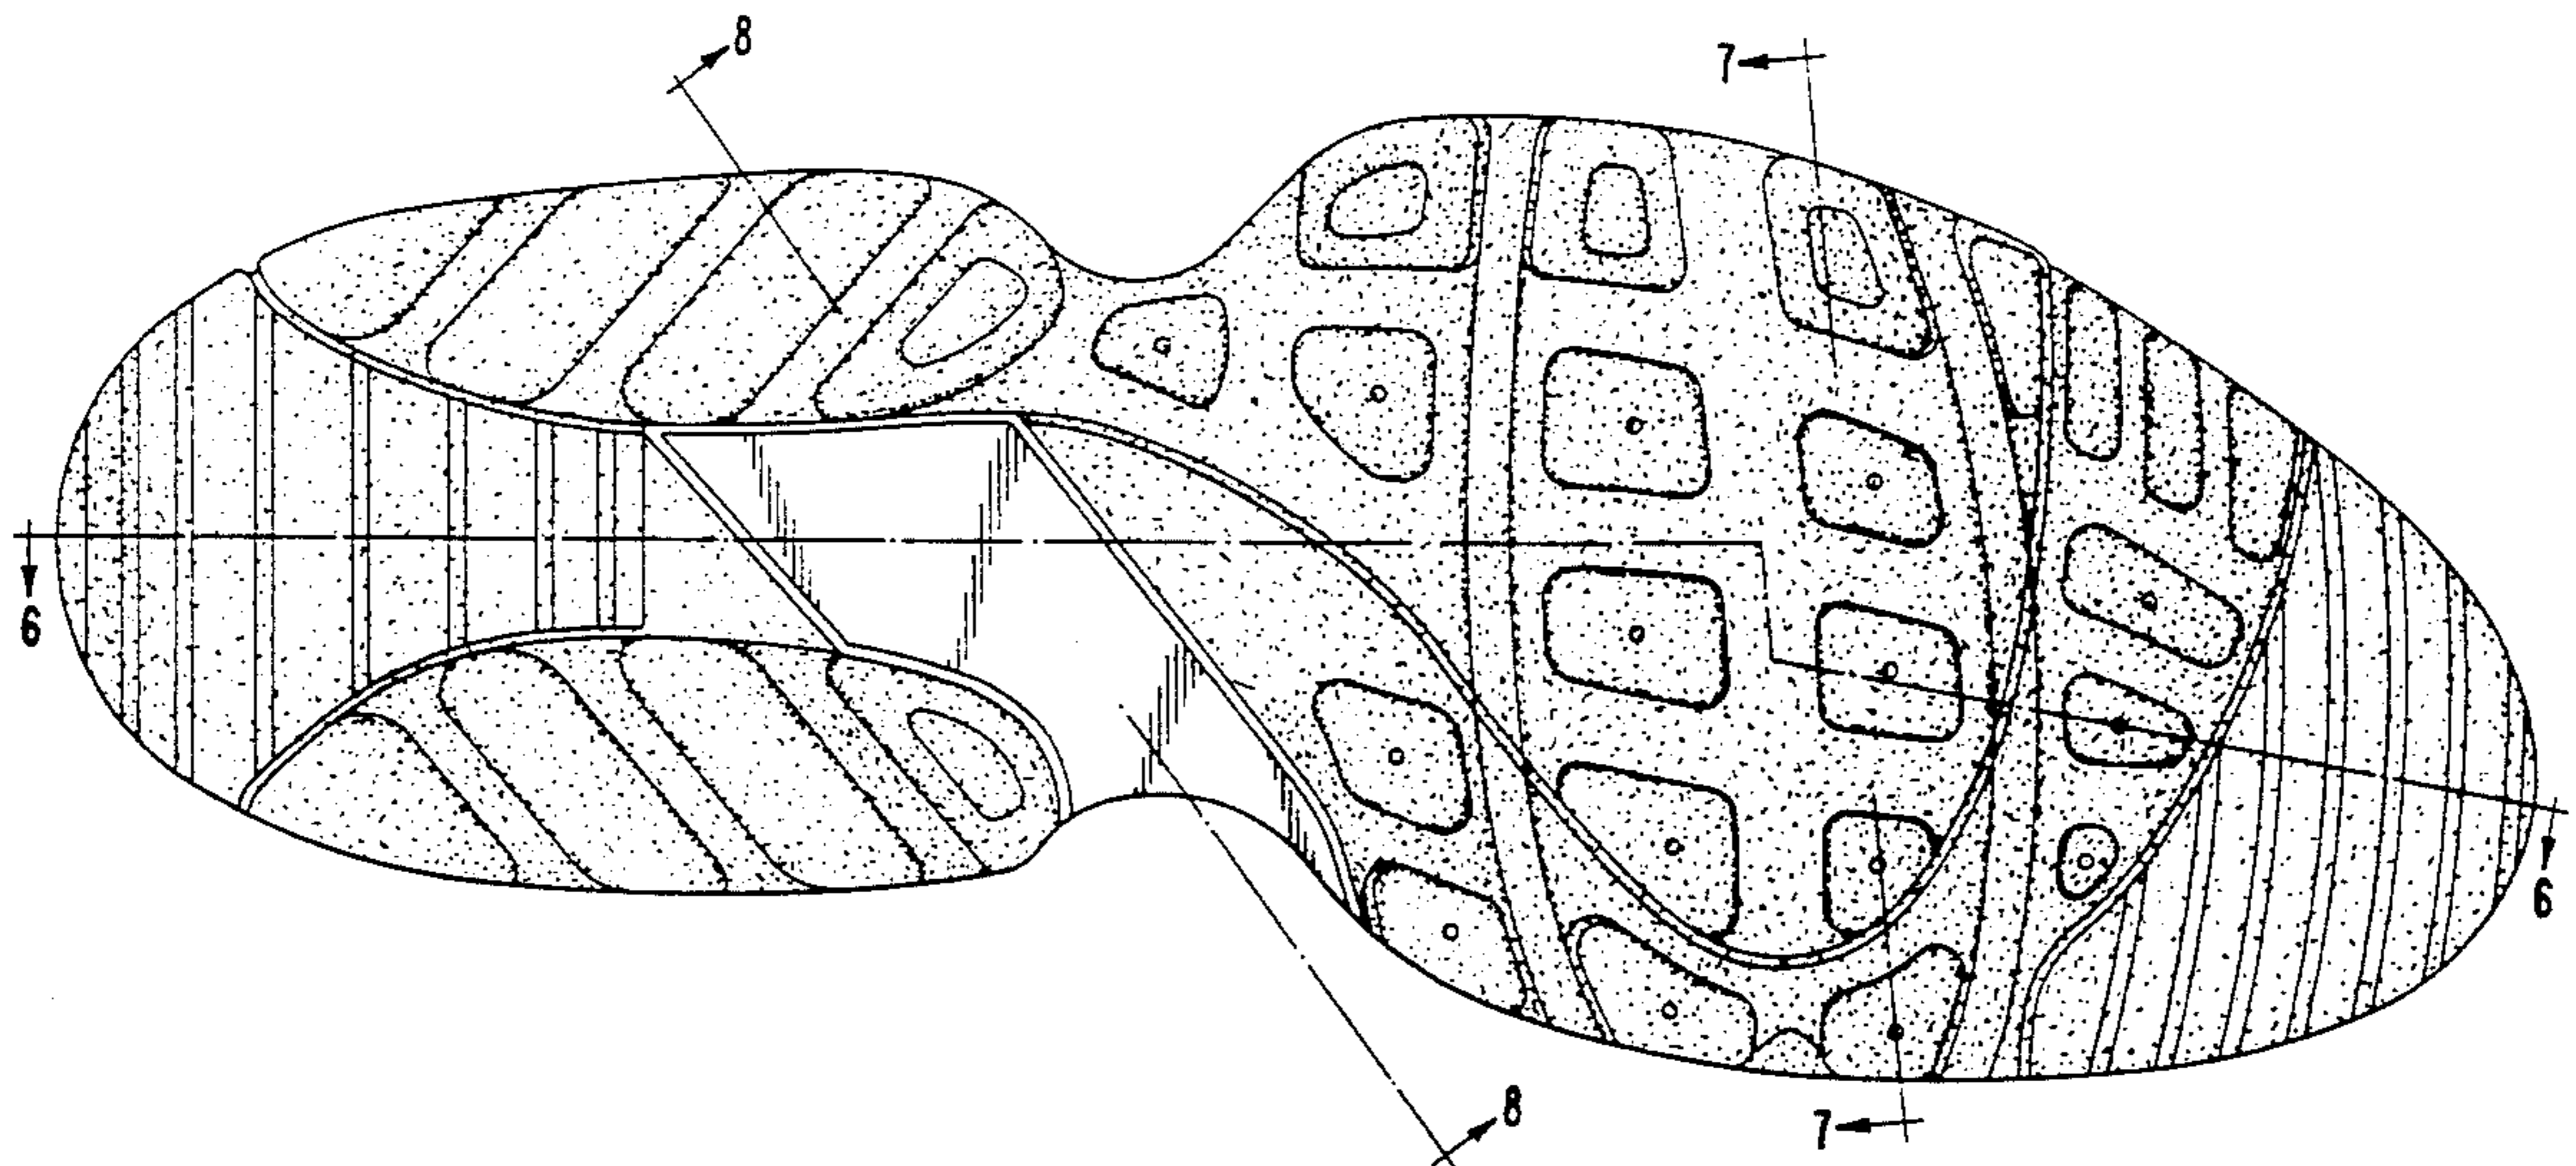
is a front elevational view of the shoe outsole shown in FIG. 1;
